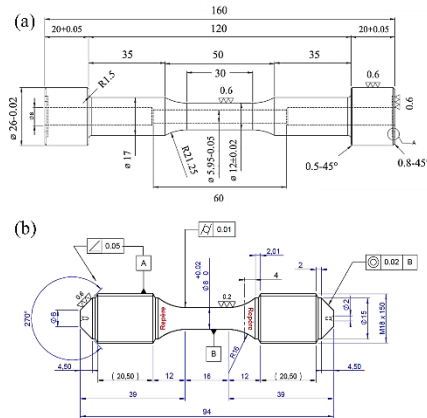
Design of the (a) hollow specimen and (b) solid bar specimen (dimensions in mm).
